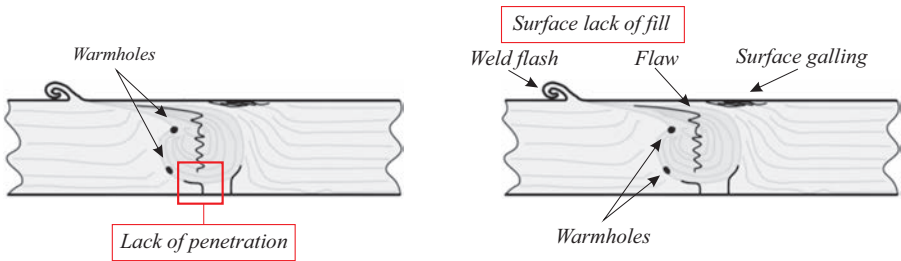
Nugget zone constriction and surface lack of fill—welding defects due to the transport of the bad conducting thin aluminum oxide sheet into the welding zone [449]
